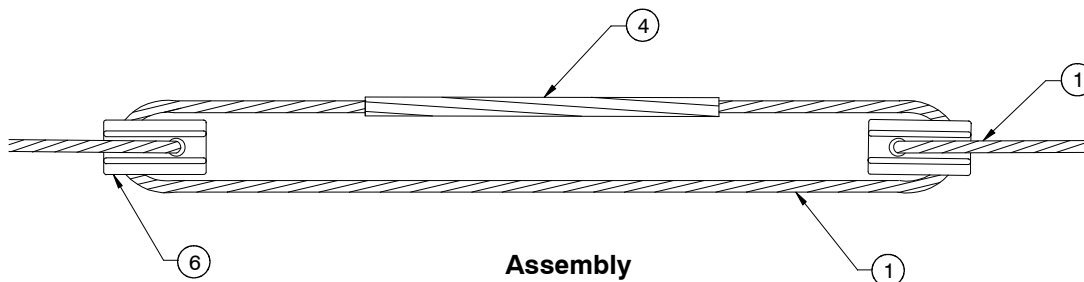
No.5 Ground Stay Anchor Assembly - Concrete Pole
